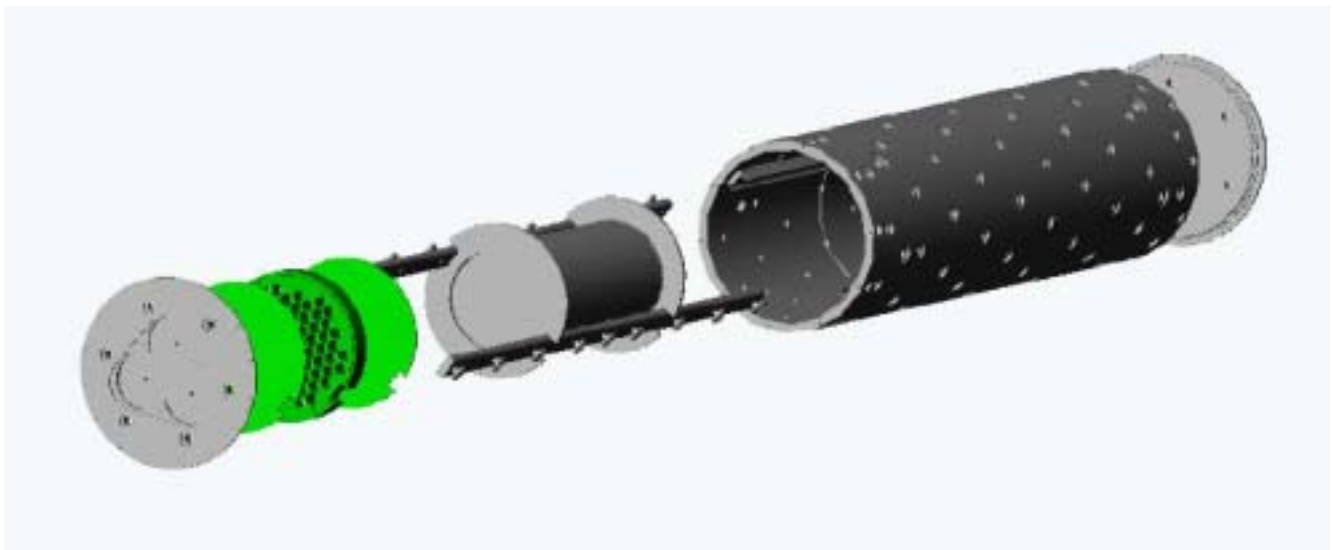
The Assembly Drawing of the Instrumented Mine showing sensor hole patterns, the internal electronics canister, end caps, and a single battery pack.
